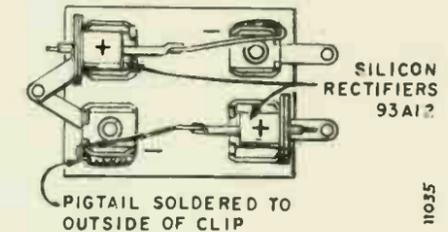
View of Fuse Holder Showing Position of Pigtail Type Selenium Rectifiers.
